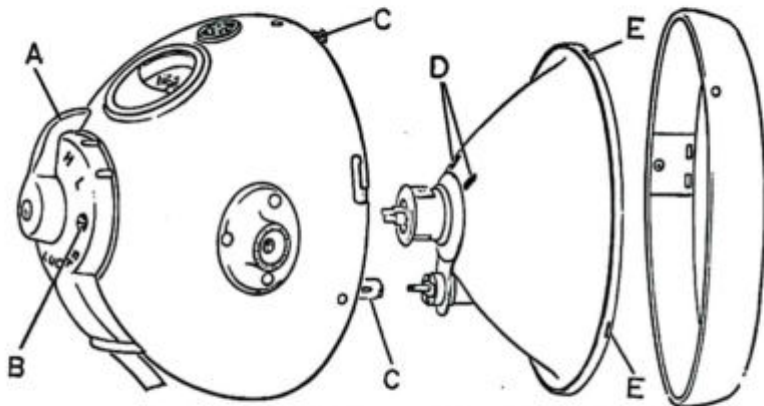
HEADLAMP TYPE H52 DISMANTLED.
